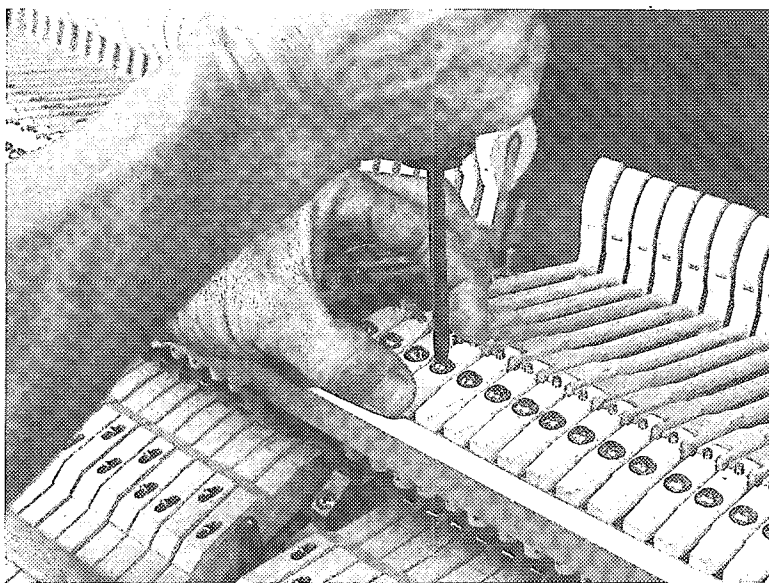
(left): After all hammers are spaced, retighten the flange screws. As you do, hold each flange as shown to prevent it from shifting while the screw is turned.
